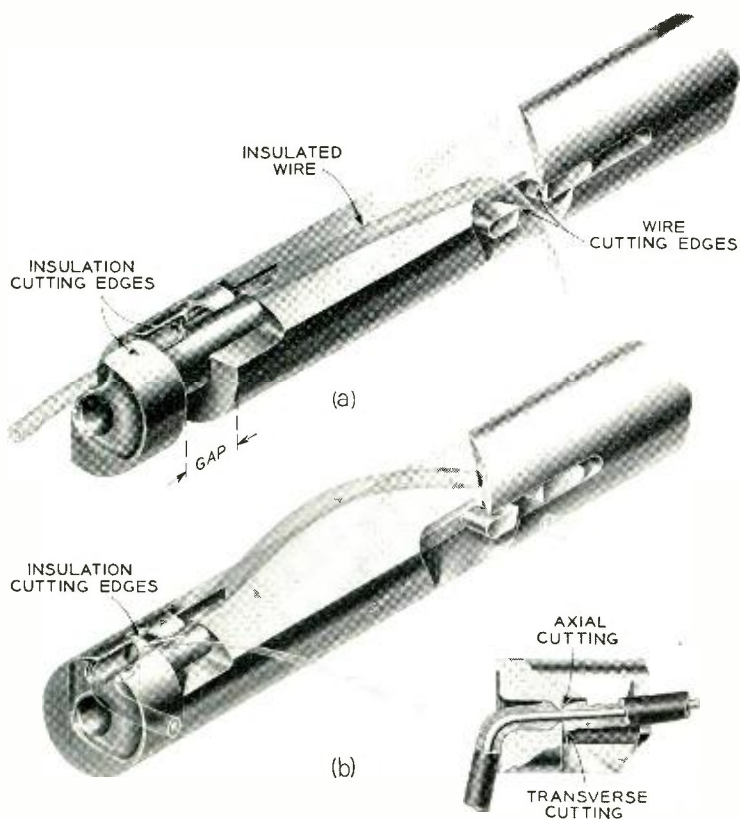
The combination tool (a) open and (b) closed, showing how the insulation and wire are cut by the two sets of cutting knives.
